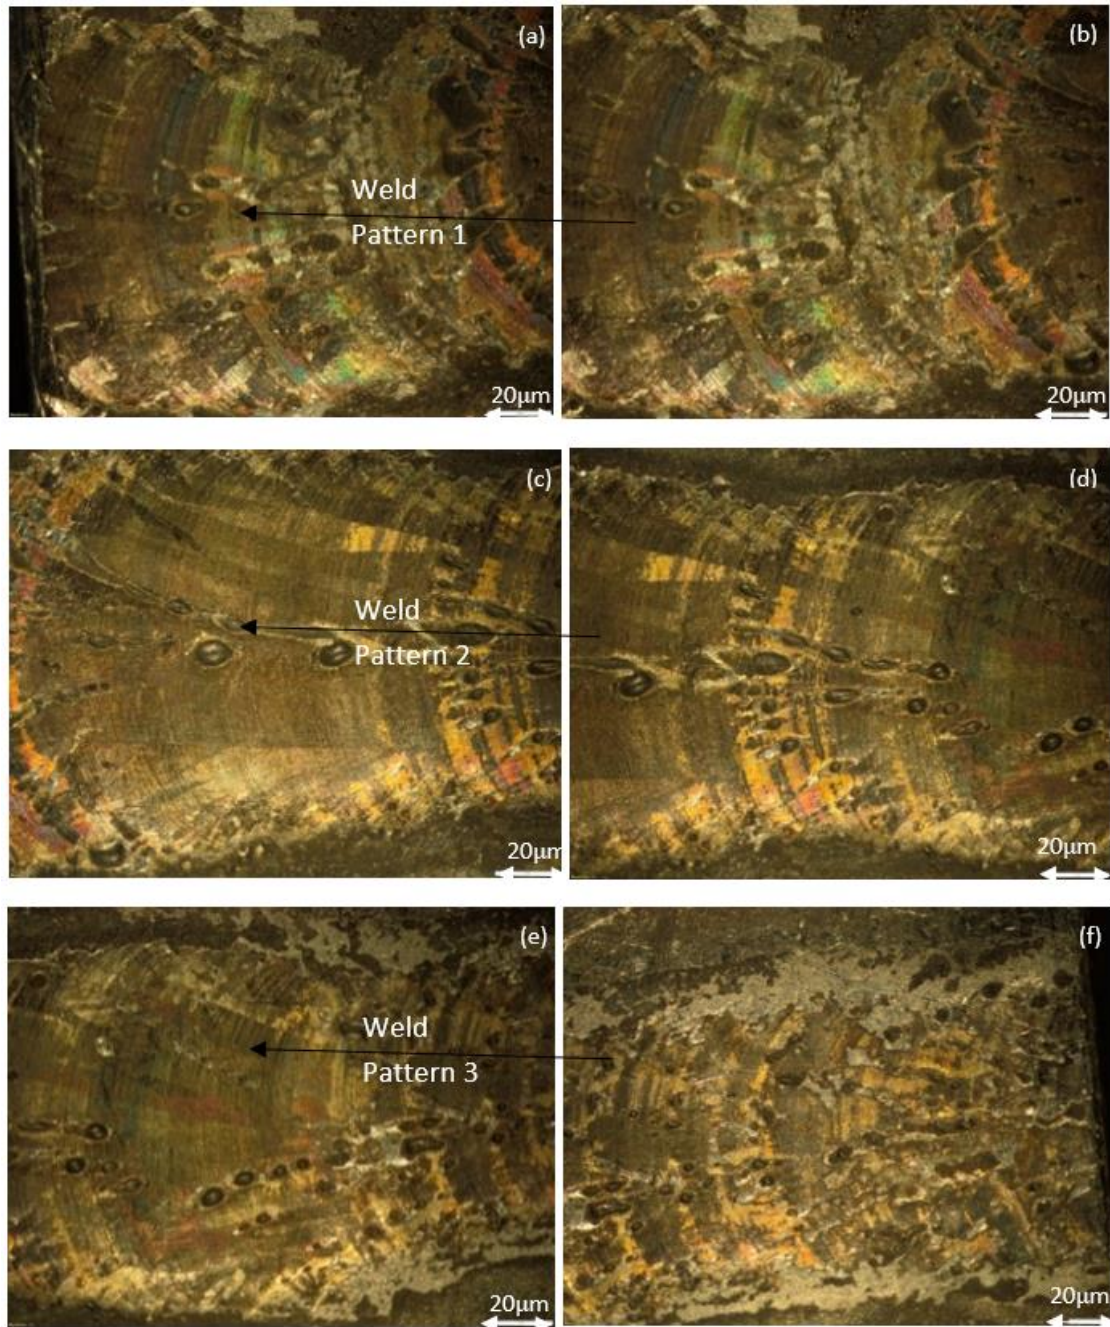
(a – b) Weld pattern 1; (c – d) weld pattern 2 and (e – f) weld pattern 3. These are the pattern of the weld surface at the top of the weld zone. Direction of weld is from left to right and the weld particles are also displayed with the larger particles (a – b), average particles (c – d) and the smallest particles (d – f). Magnification of x20
